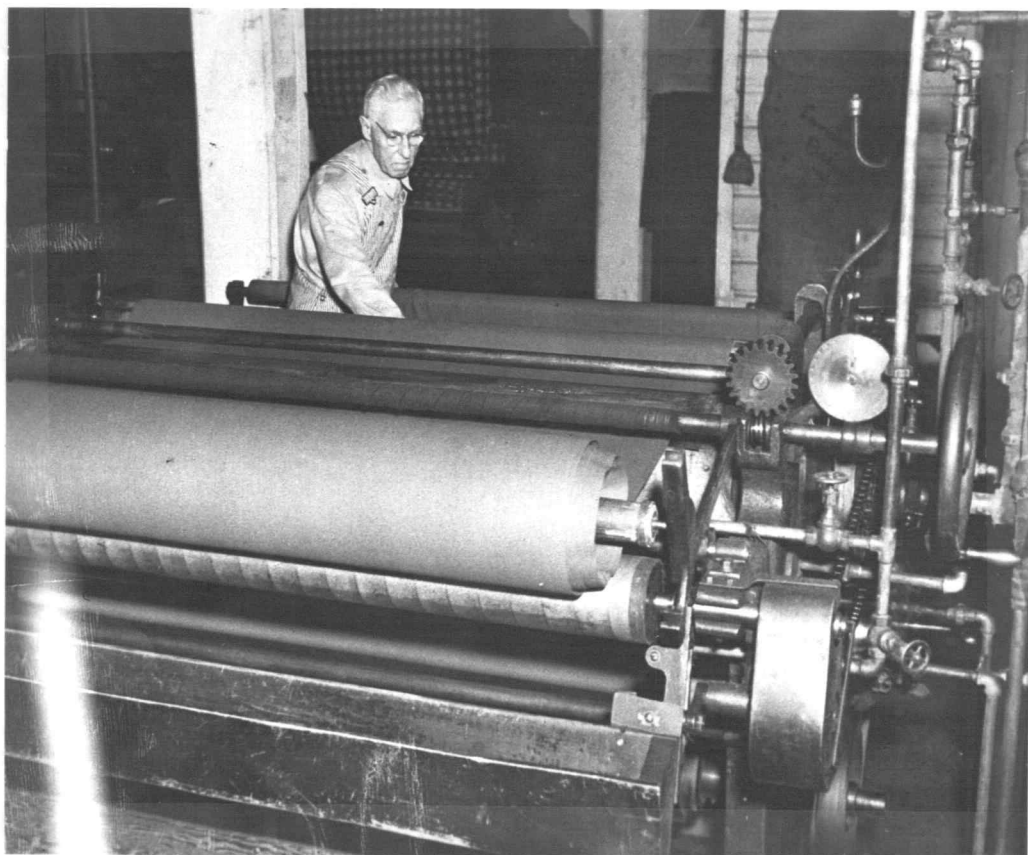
Pressing machine which hooks and stretches fabric to keep it square while pressing. 1947
